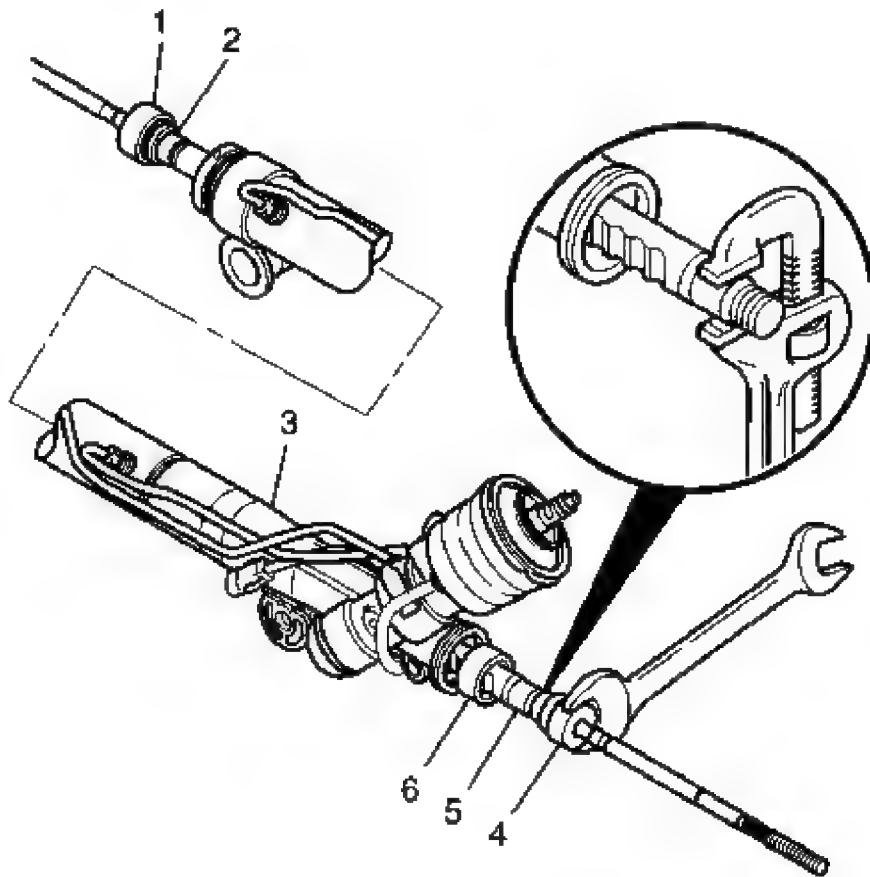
View of Shock Dampener, Inner Tie Rod Housing, and Rack
